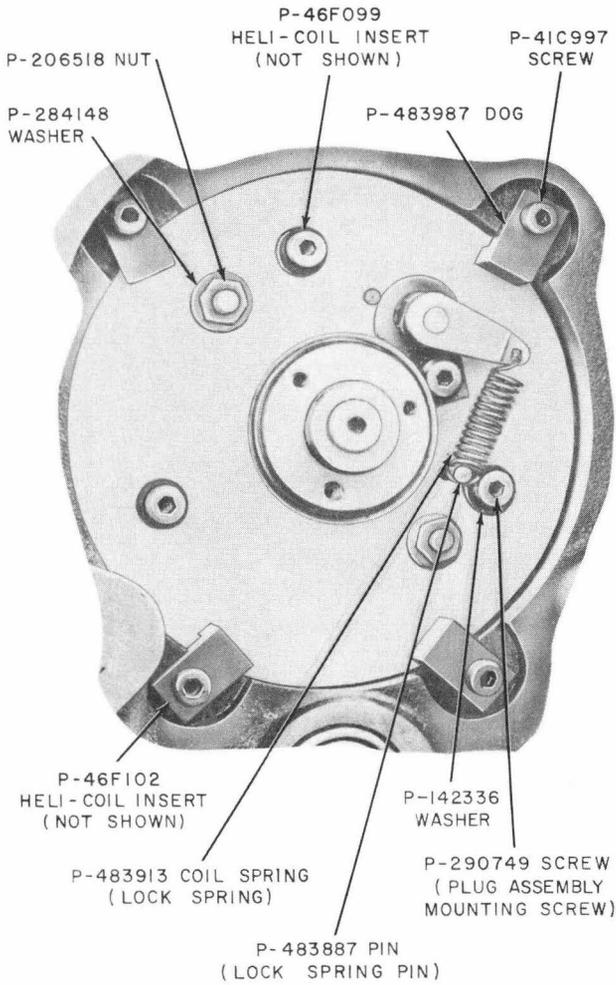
KS-13835 Reader—Stepper Plug Assembly—Portion Outside of Shell
